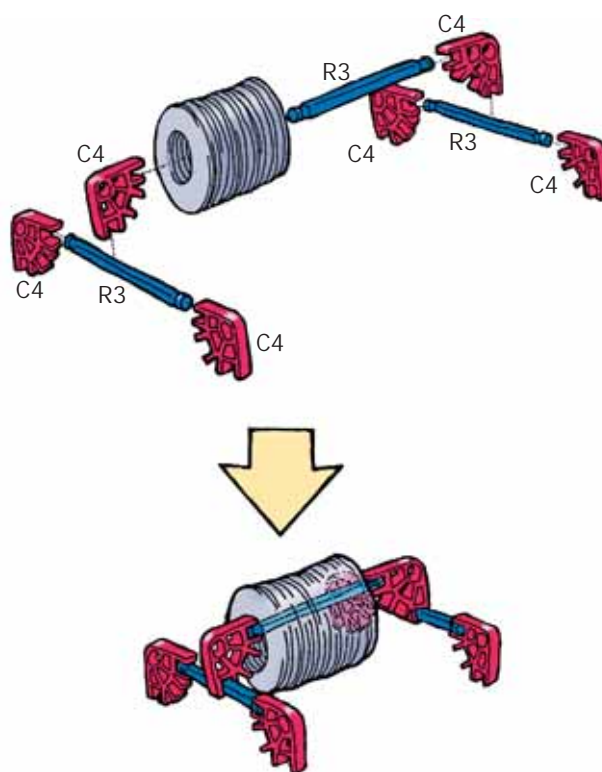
How to assemble the washer seat for K'NEX® sled
